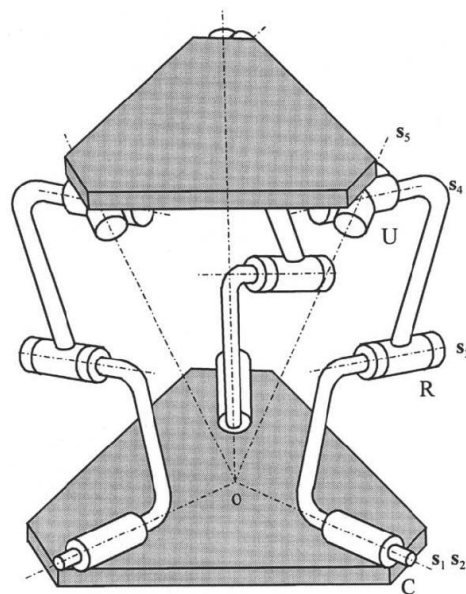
A 3-CRU rotational parallel mechanism [12]
